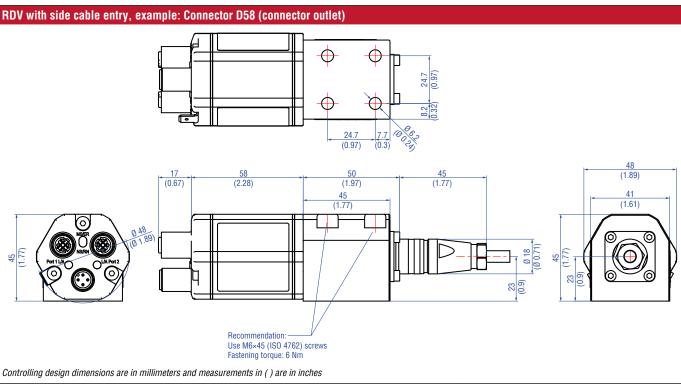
Temposonics® RDV sensor electronics housing with side cable entry
